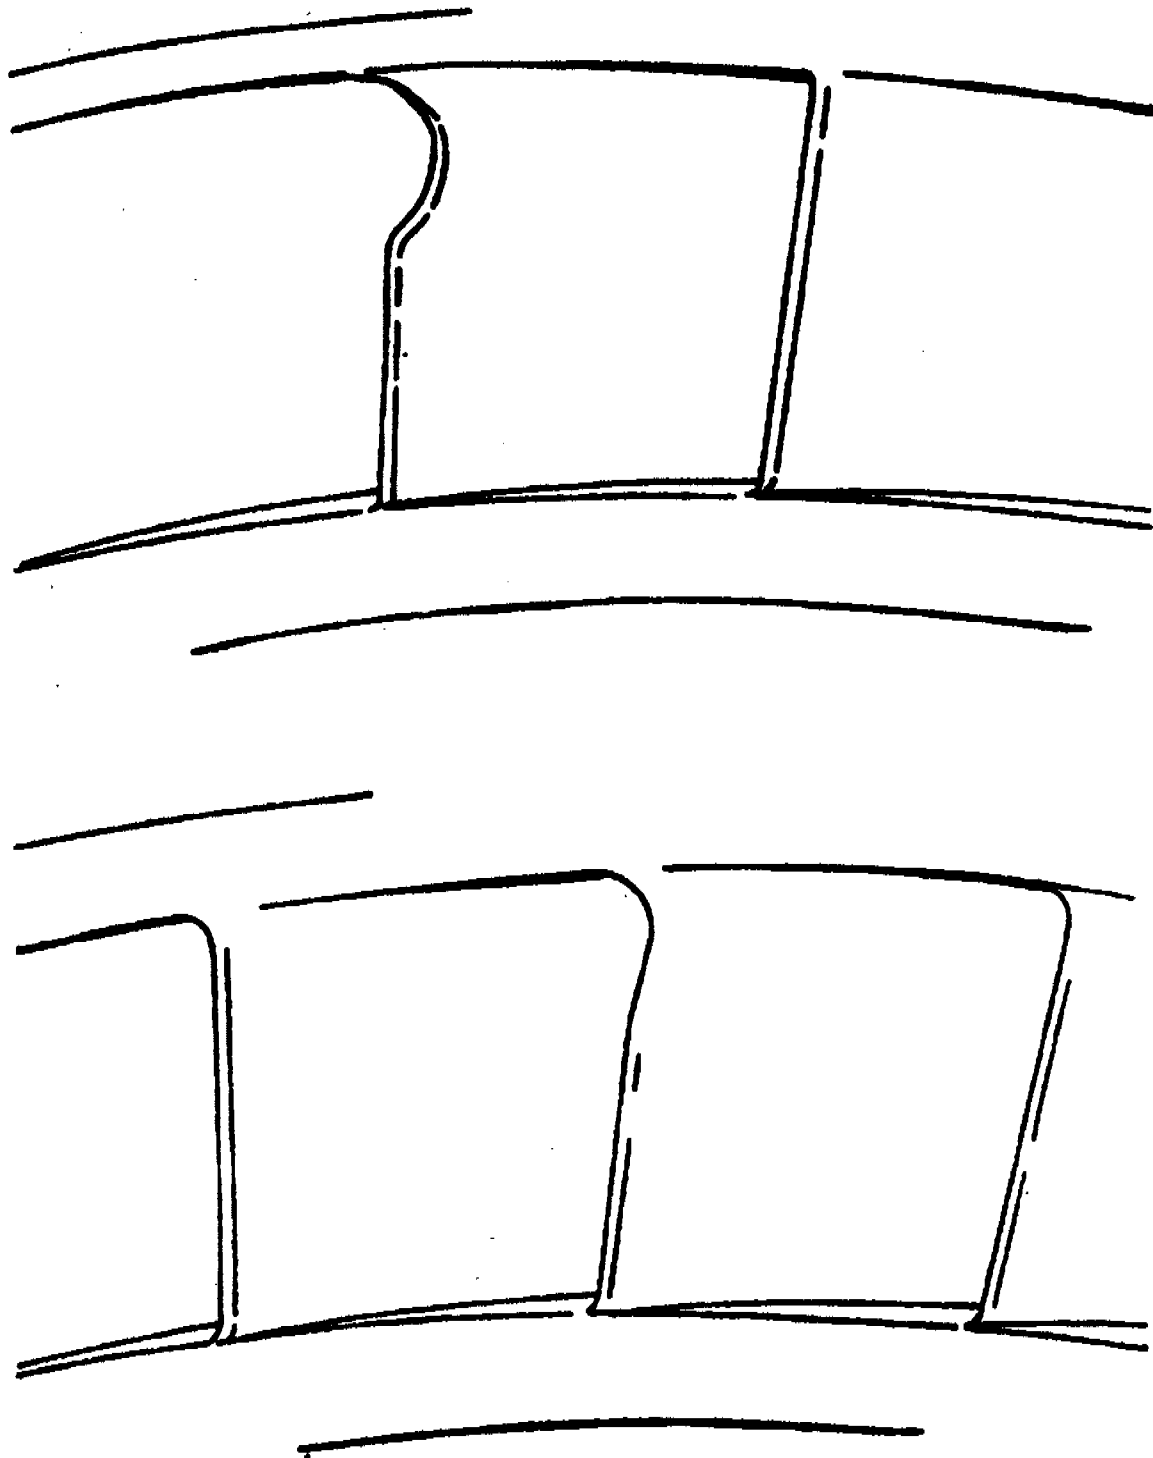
First Stage Gas Producer Nozzle Assembly; Typical Manufacturer's Blend-Repair Areas of Vane Trailing Edges (Sheet 2 of 2).
